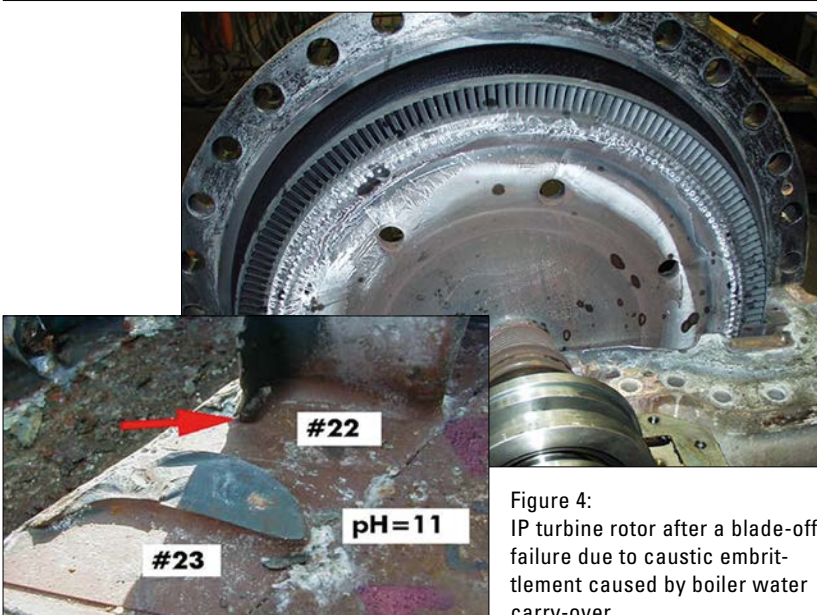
IP turbine rotor after a blade-off failure due to caustic embrittlement caused by boiler water carry-over.
